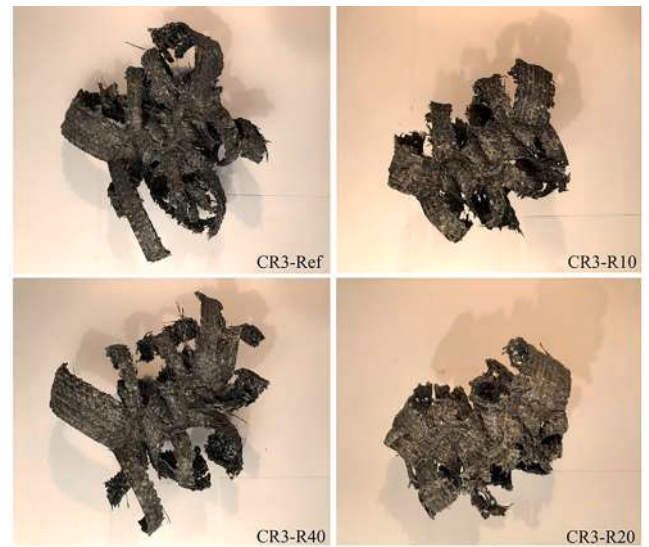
Top view of CR3 specimens after crushing (one specimen per material configuration is shown).
